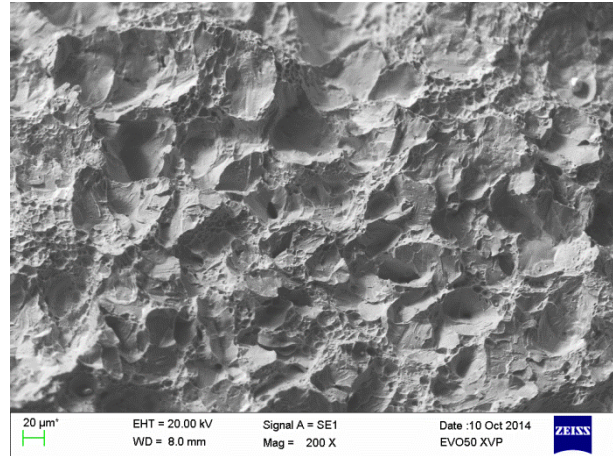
Fracture surface of impact specimen HIPed at 1250°C, 200x magnification [5]
